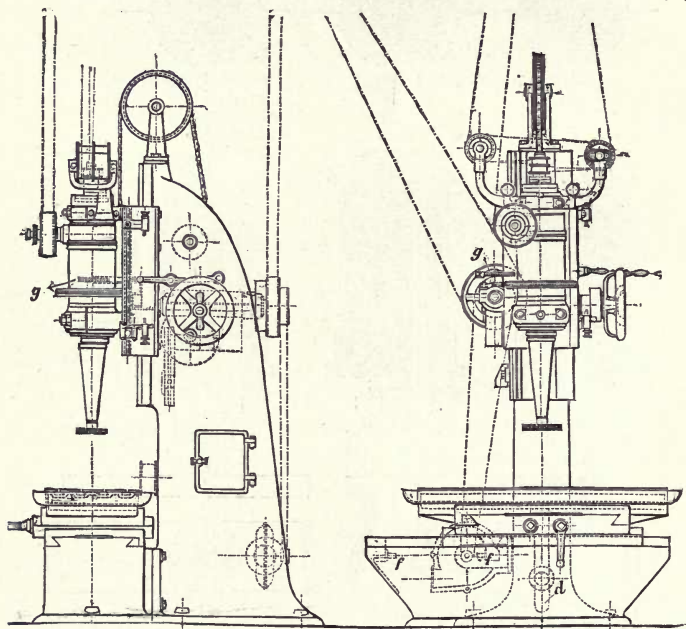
Automatic Vertical Grinding Machine with Patented Planet Grinding Spindle and Two-spindle Drive.
